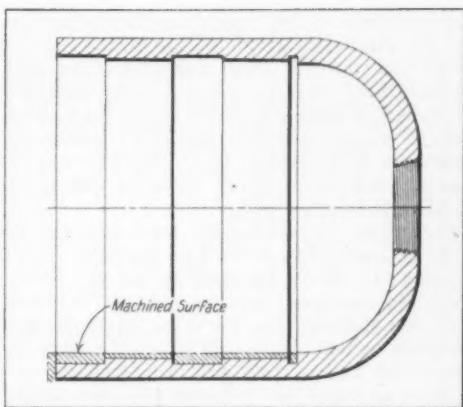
Diagram Indicating the General Form of the Bore in the Bearing Housings
